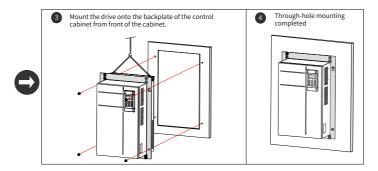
Through-hole mounting of 45 to 160 kW models
